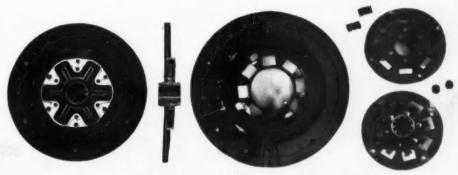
(Left)—Cushion drives are incorporated in many clutches to dampen out torque impulses. Fig. 8—(Below) — Three-section inner member of free wheel used by Hupmobile
